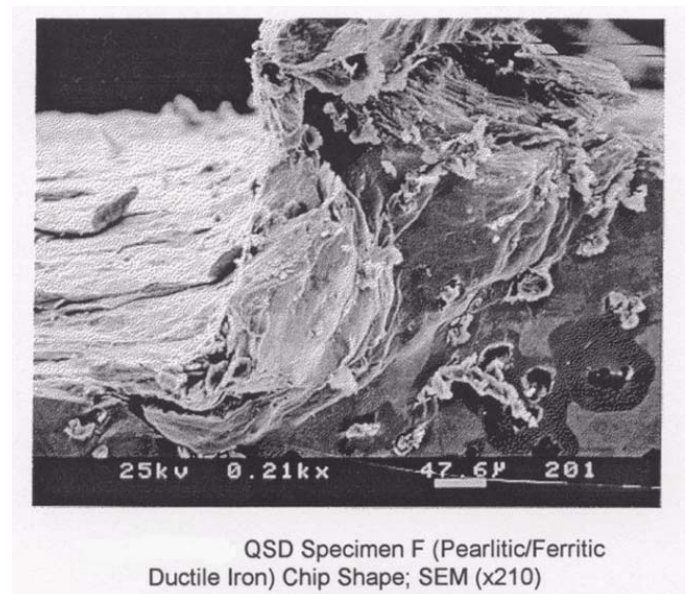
SEM image of the initial stages of chip formation ahead of the cutting tool during high speed machining.
